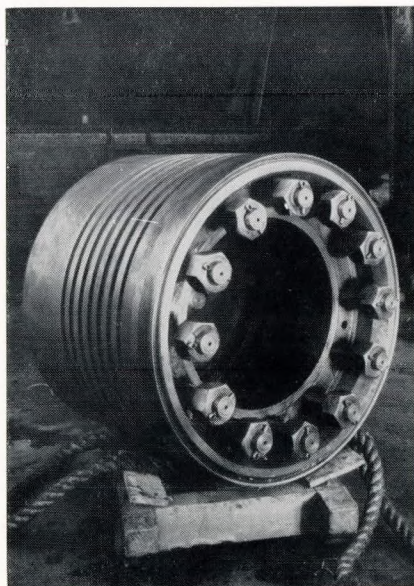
Large marine oil engine piston in S.G. iron, 30-in. diameter, 15 cwt. finished weight
